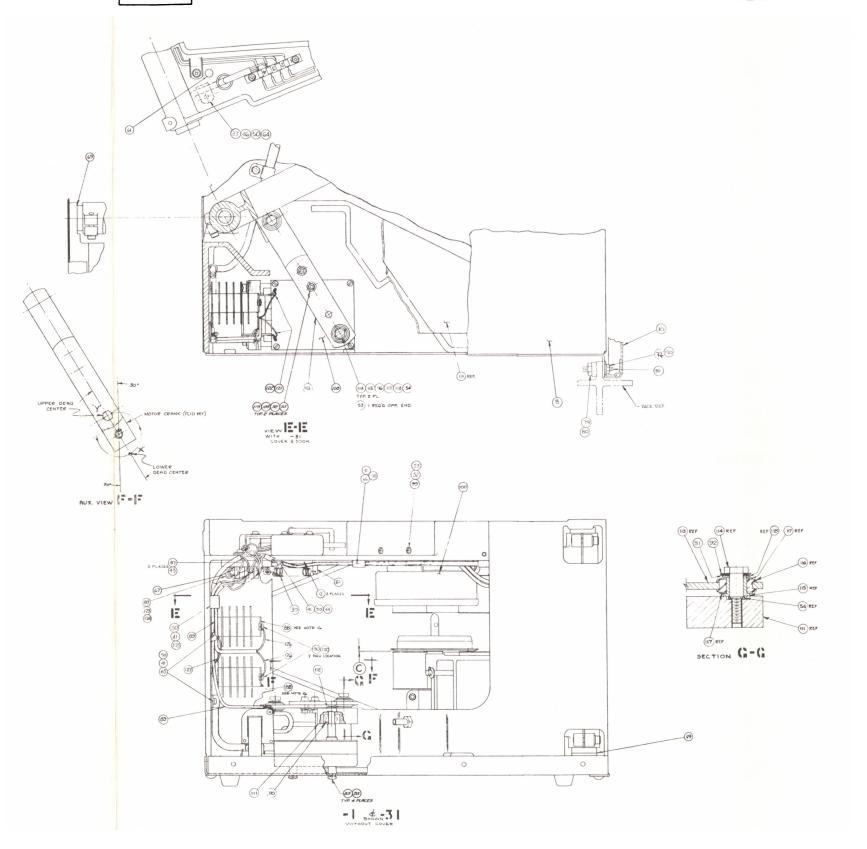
Degausser Assembly (Sheet 2 of 2) Dwg. No. 22070V
